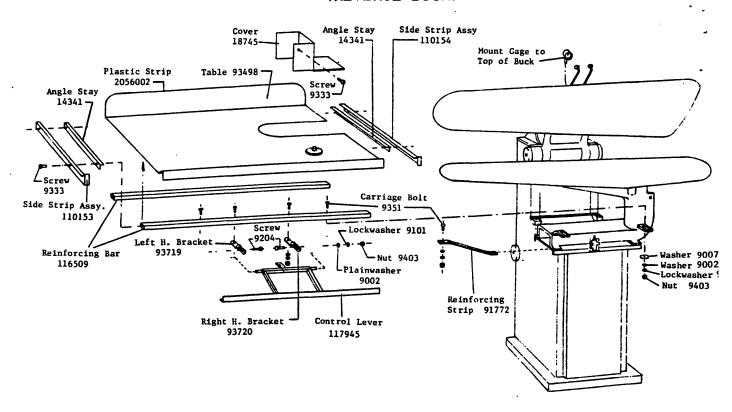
ASSEMBLY OF TABLE (REGULAR BUCK)
